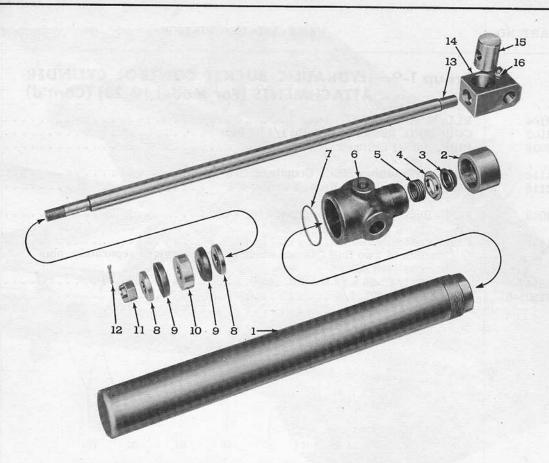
Hydraulic Bucket Control Cylinder Assembly
